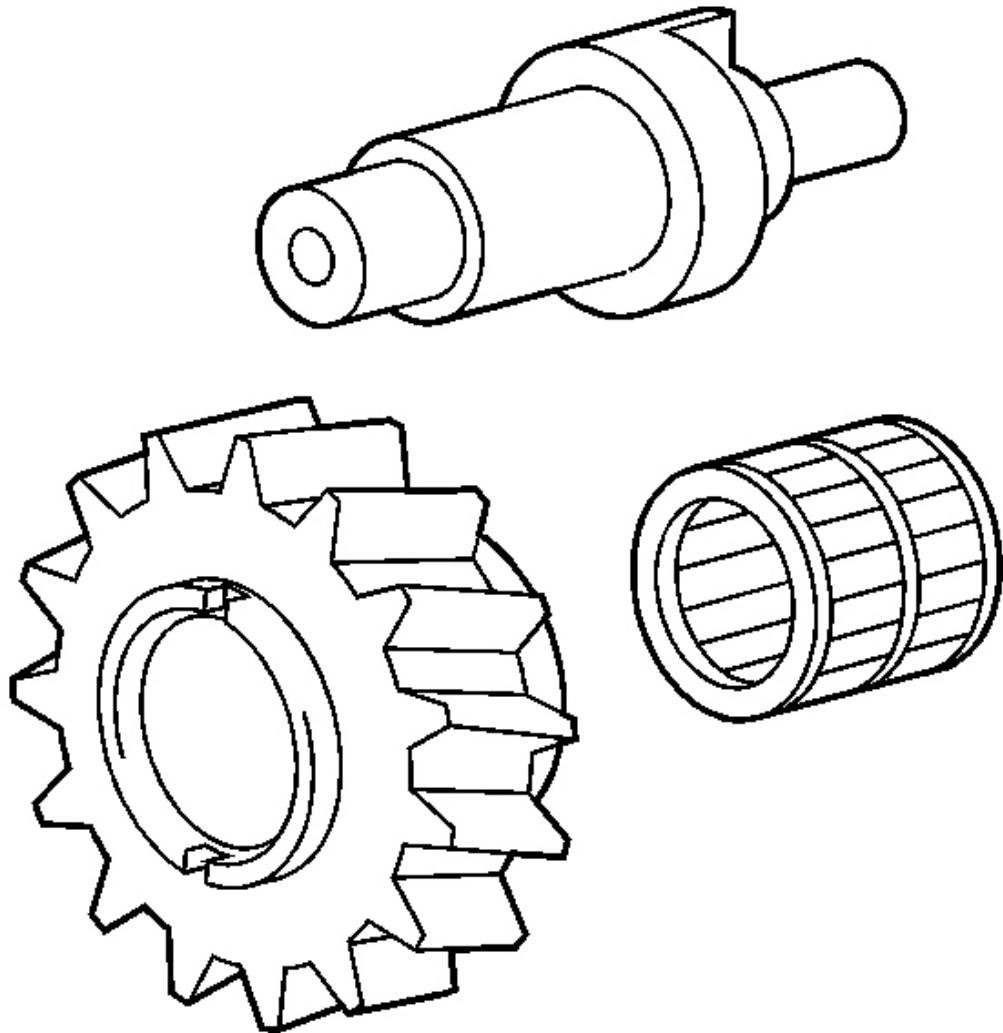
View Of Reverse Idler Gear, Shaft & Bushing
